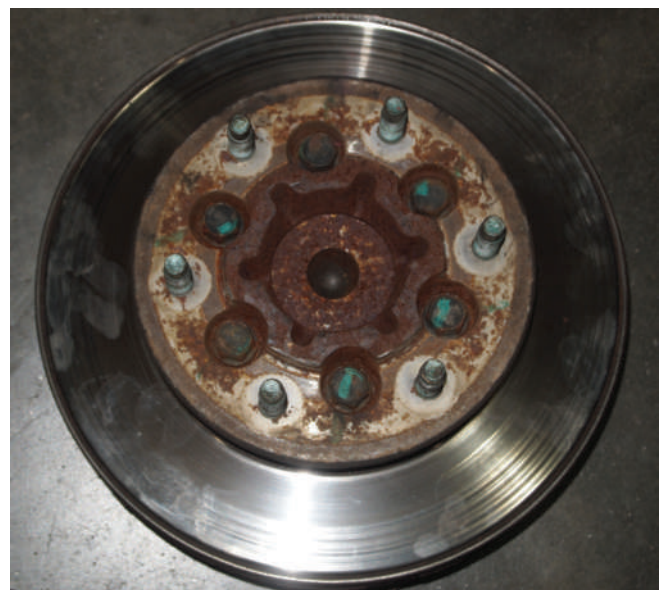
Once the hub unit and rotor are removed, the rotor can be unbolted from the hub.
